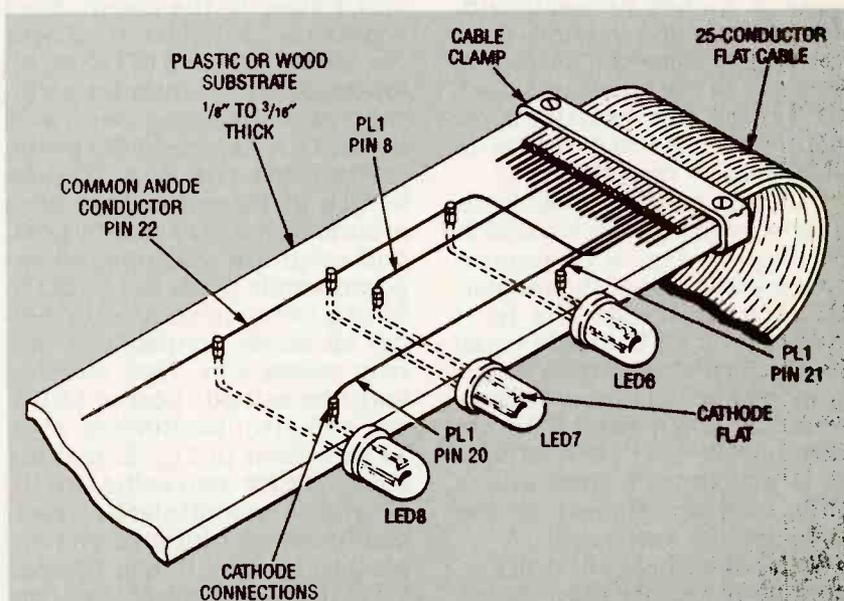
DETAILS FOR BUILDING THE INDICATOR PANEL. LED leads are bent and inserted in drilled holes in wood or plastic strip and soldered connections are made as shown. Protect exposed conductors with tape or covers (not shown).
